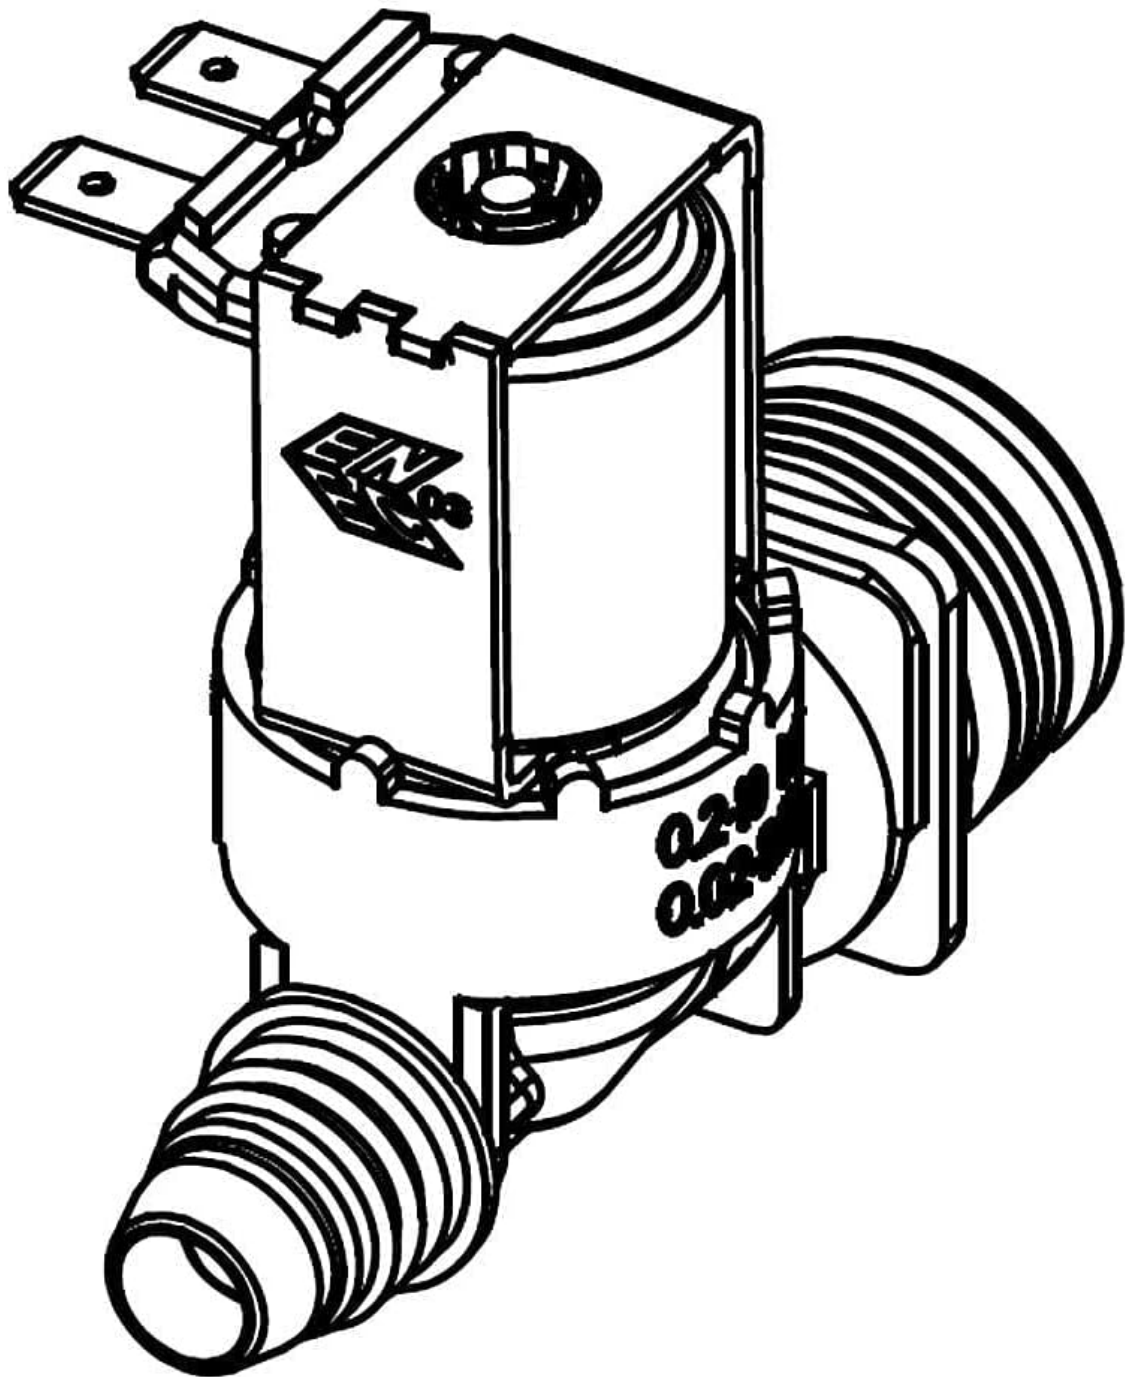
Technical drawing illustrating the Samsung DC62-30314V cold water inlet valve with its components.
